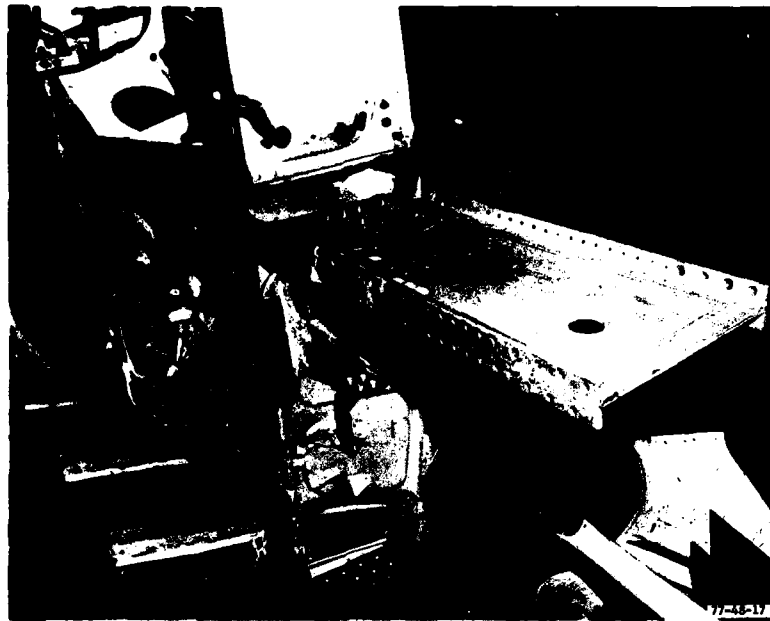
FAILURE OF MAIN SPAR, LEFT WING, TEST 1
